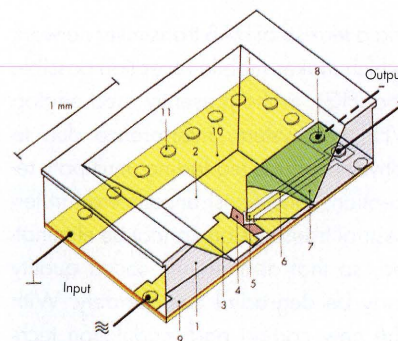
Sectional view of measurement cell of thermocouple sensor shown in FIG 20
